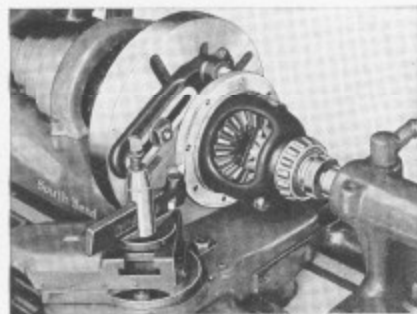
Truing a Differential Gear Case Flange for New Ring Gear.
